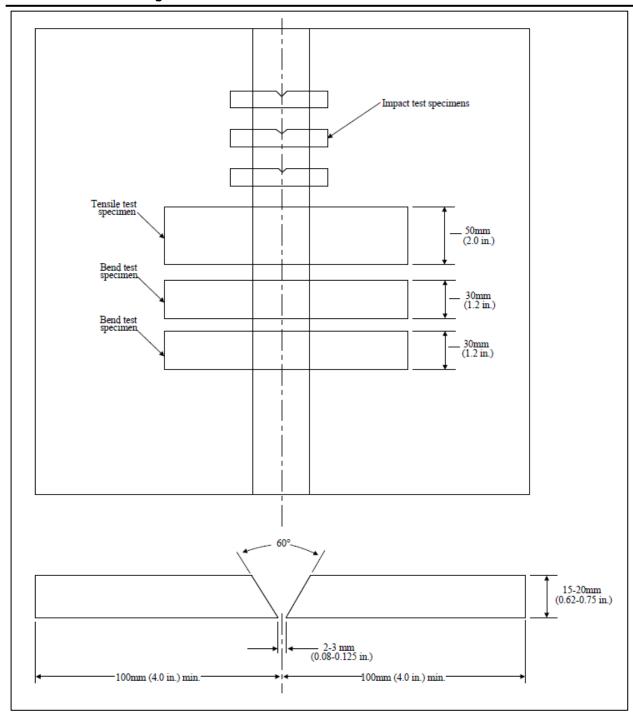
Butt-Weld Test Assembly for Manual and Gas-Metal Arc Welding
